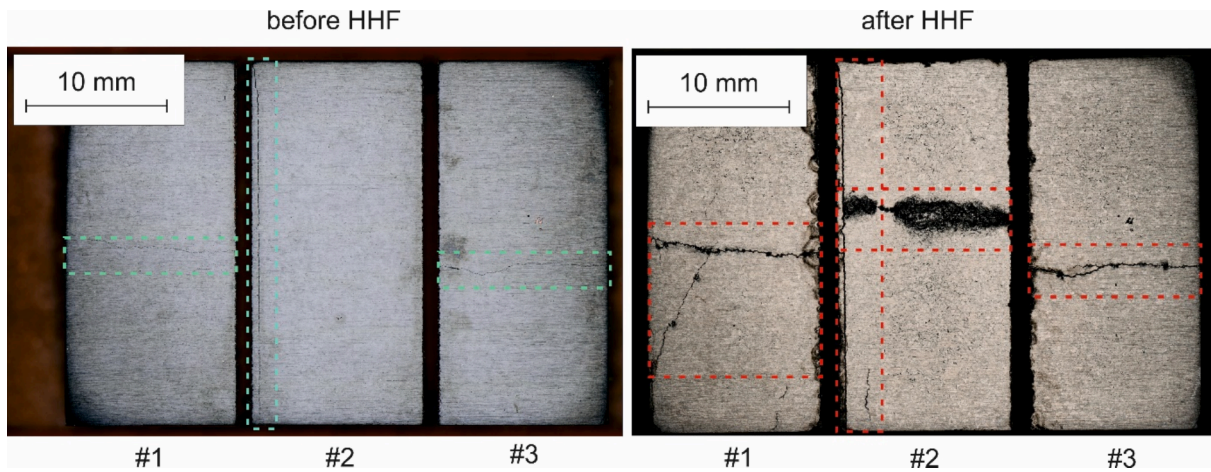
Surface of mock-up III before HHF testing (left) and after HHF testing (right).
